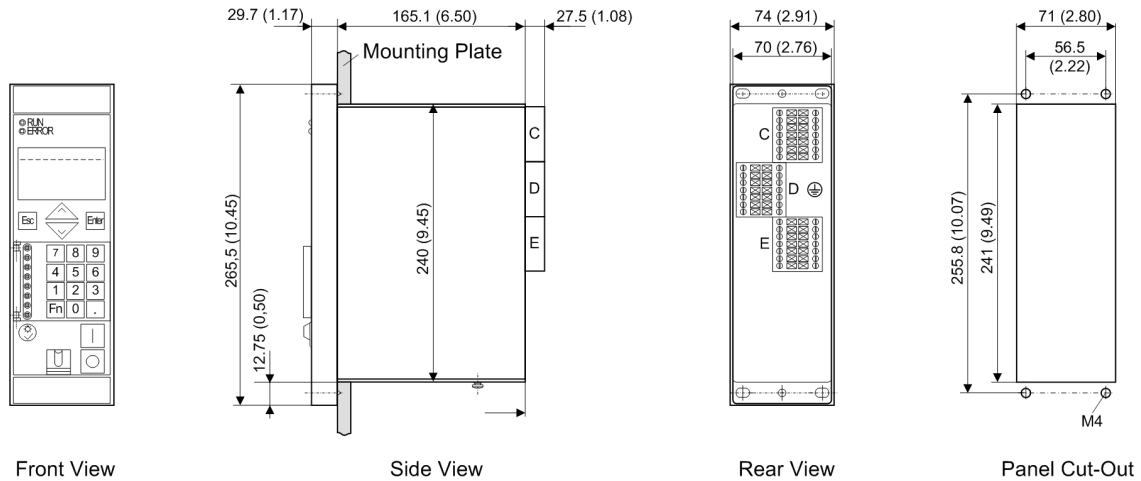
Dimensional drawing of a 7RW80 for panel flush or cubicle mounting (housing size 1/6)
